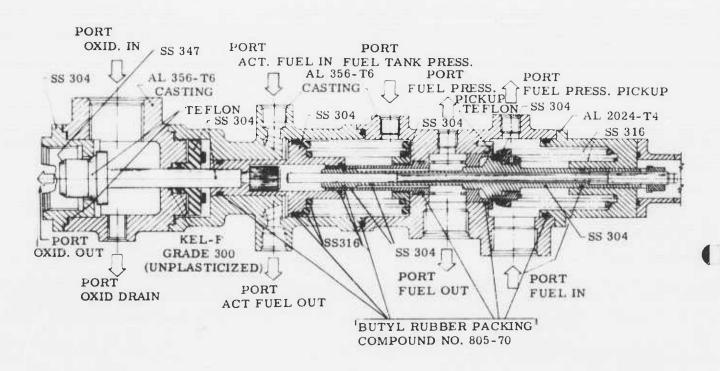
Cross Section-Valve Assembly - Propellant, Thrust Chamber 62-472-163
